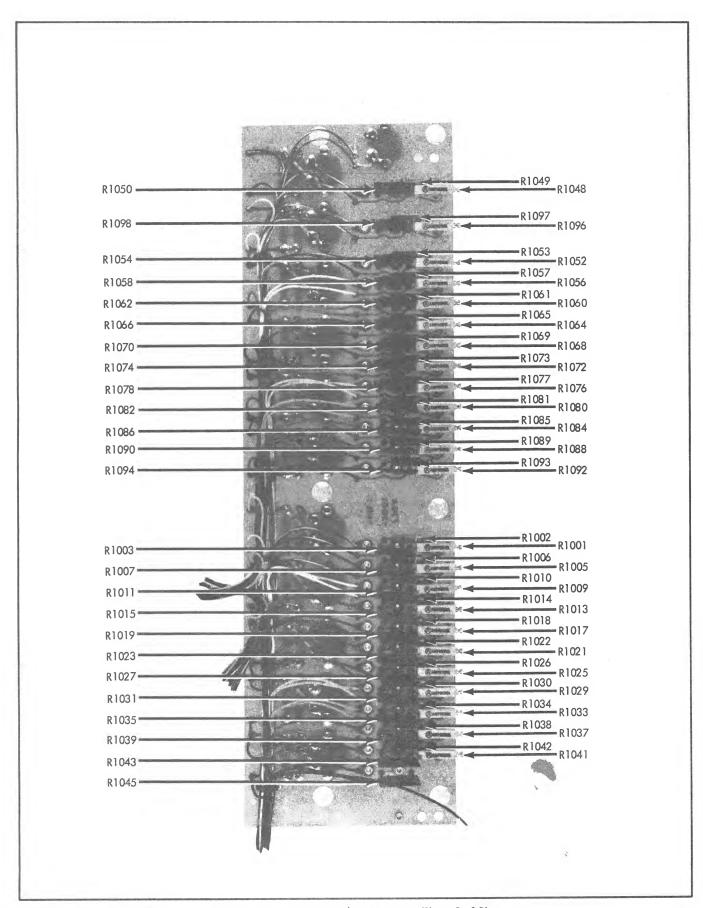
TRIMMER P/C ASSEMBLY (Sheet 2 of 2)
